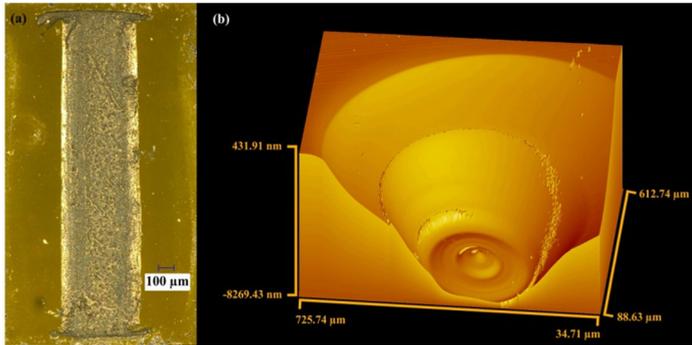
Diamond surface after 5h contact test (a) and 3h friction polishing (b)
